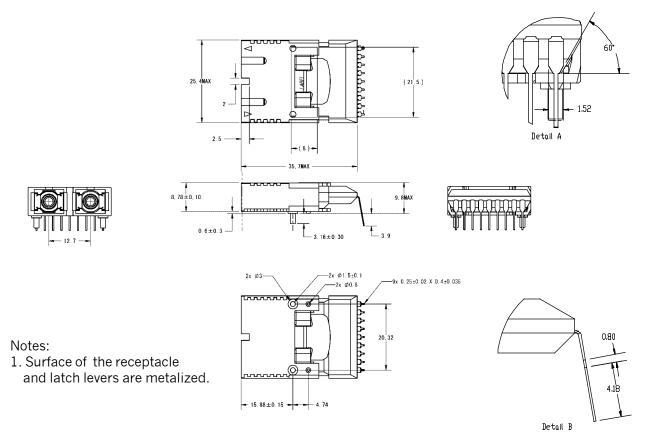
Outline Dimensions (SDM7111-GC-ZN)
